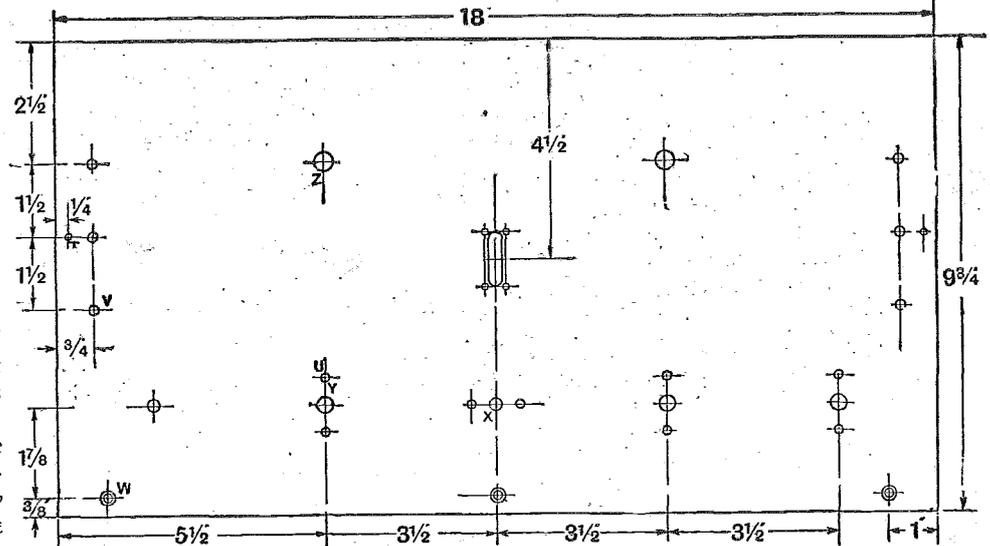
Dimensional drawings of front panel. Drilling sizes: T, 1/8in. clearance for 6 BA; U, 5/32in. clearance for 4 BA; V, 3/16in. clearance for 2 BA; W, 3/16in. and countersunk for No. 4 wood screw; X, 5/16in.; Y, 3/8in.; Z, 7/16in.
